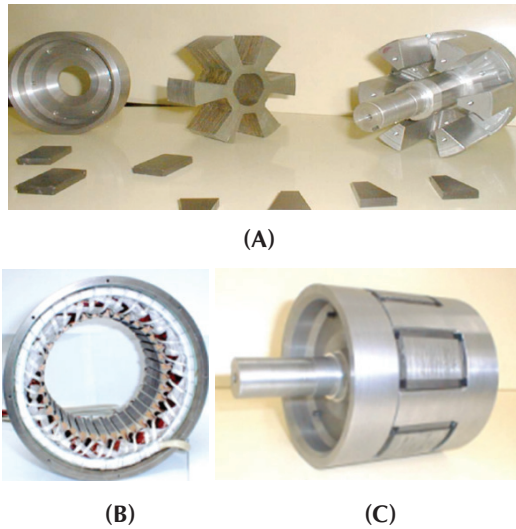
DESM prototype (A) disassembled rotor, (B) stator, and (C) assembled rotor.
